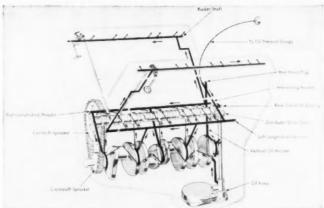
Courtesy of Cadillac Motor Car Division, General Motors Corp.
